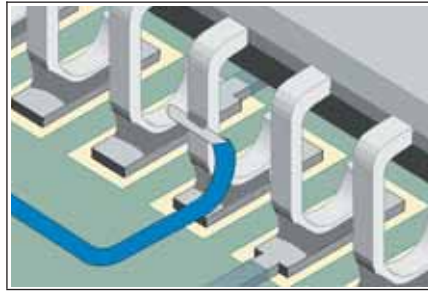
Not Recommended Wire soldered perpendicular to lead.
